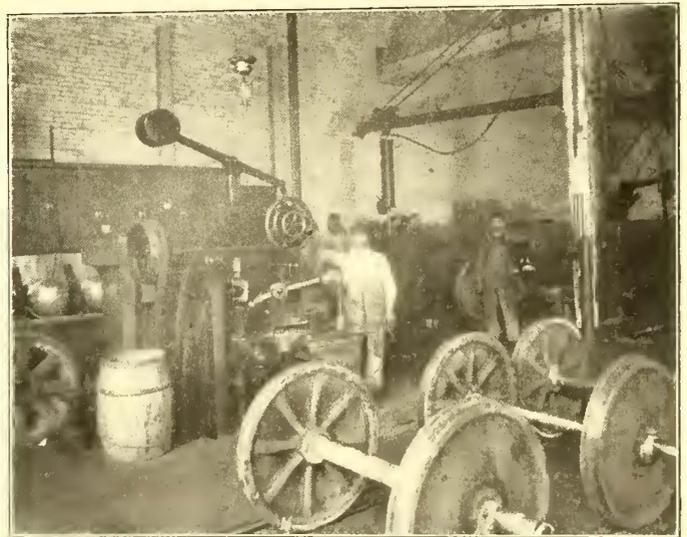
MACHINE SHOP, SHOWING WHEEL PRESS AND WHEEL BORING MACHINE, ALSO AT LEFT, TYPE OF WASH BASIN USED IN SHOP
